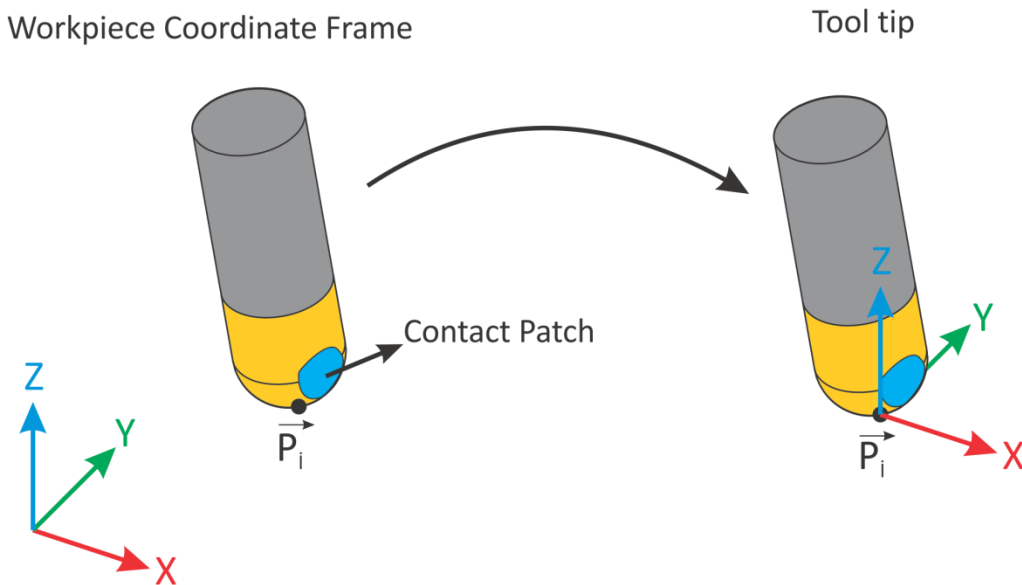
Transformation from workpiece coordinate frame to tool tip
